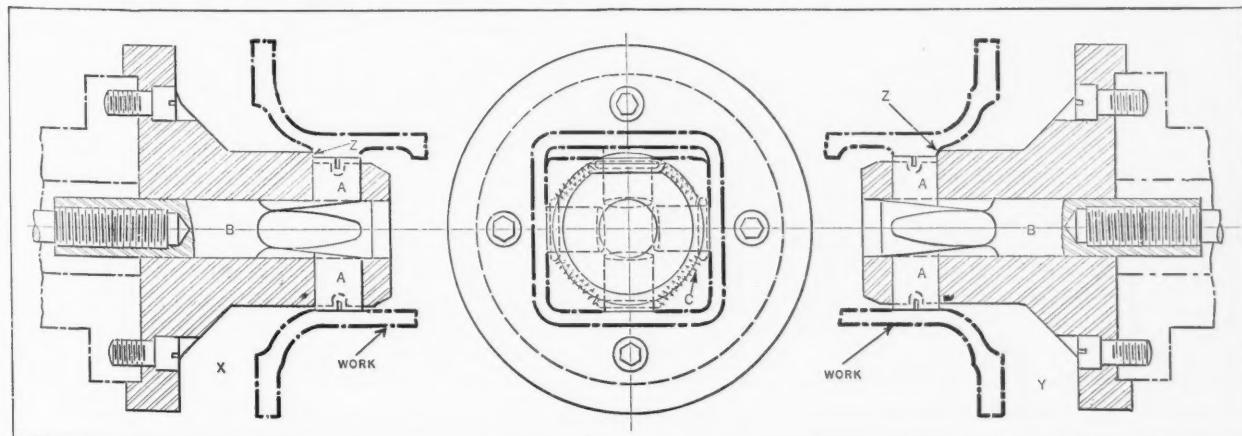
Expanding Mandrels Used in Gripping Both Ends of Long Housings during a Lathe Operation
